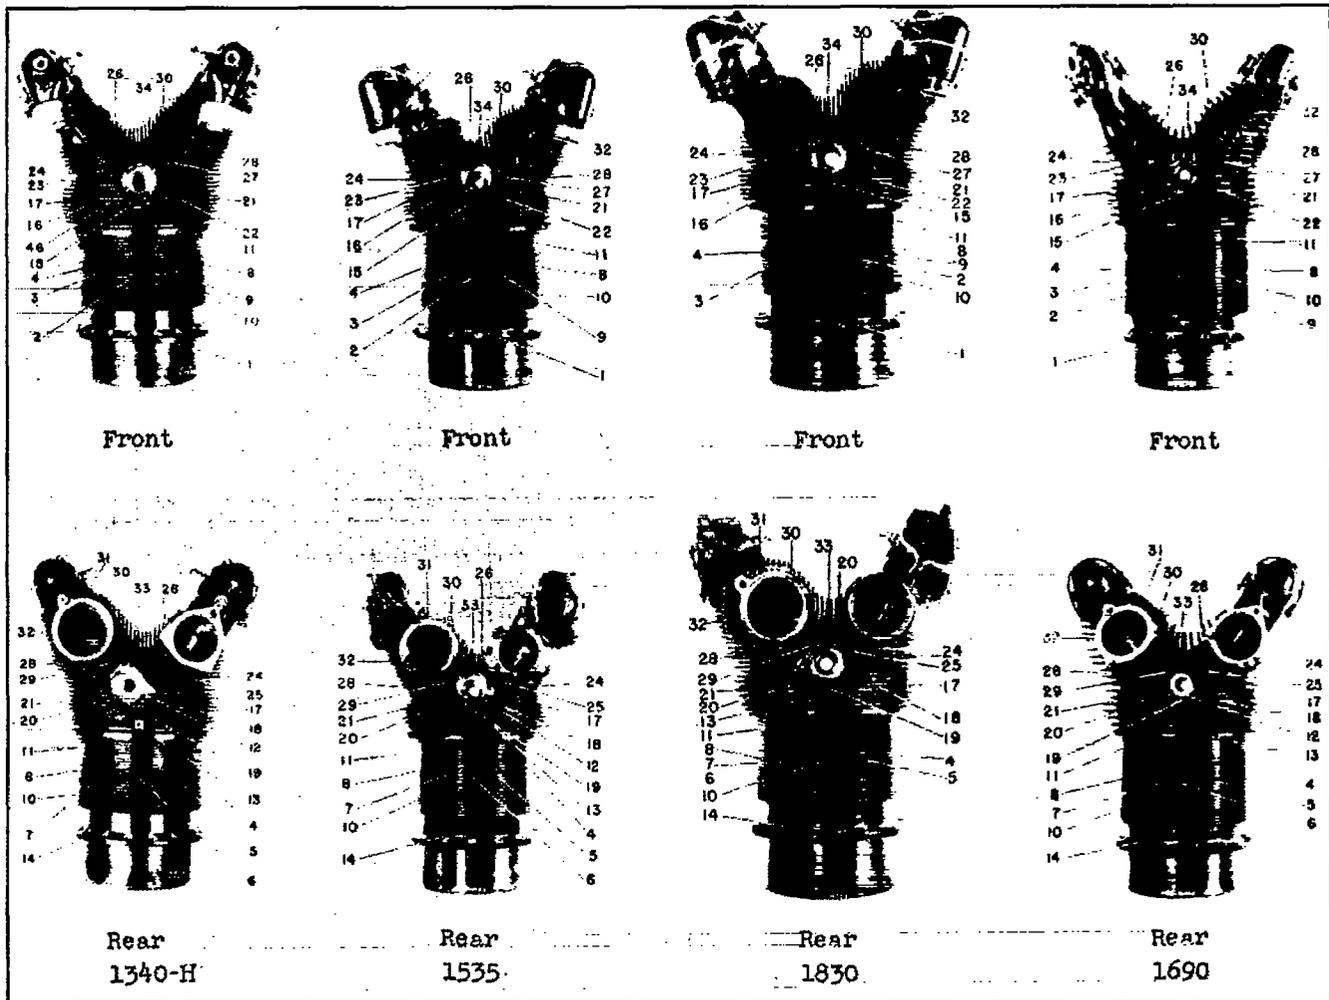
(a).—Front and rear views of cylinders from Pratt & Whitney engines showing location of thermocouples.
